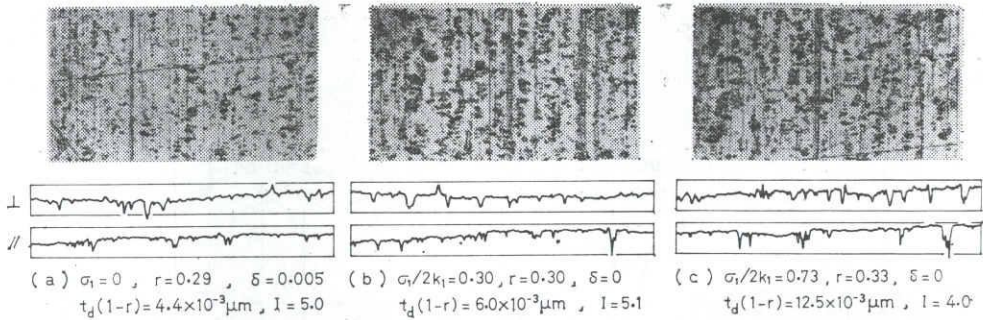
Surface texture of the rolled sheets (A1050P-O-Spindle oil #150)
